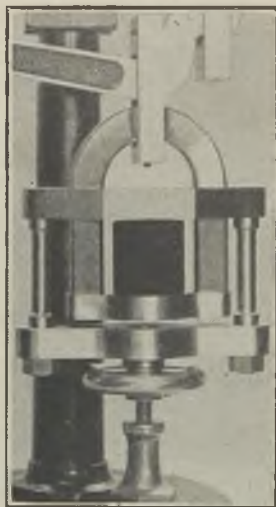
COMPRESSION LINK FITTED TO STANDARD CEMENT-TESTING MACHINE FOR OBTAINING DRIED COMPRESSION STRENGTH OF MOULDING SANDS.
